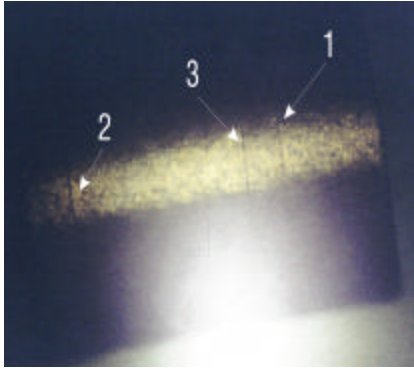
Testing piece used in the measurement of the determination of the positional characteristic tests.
